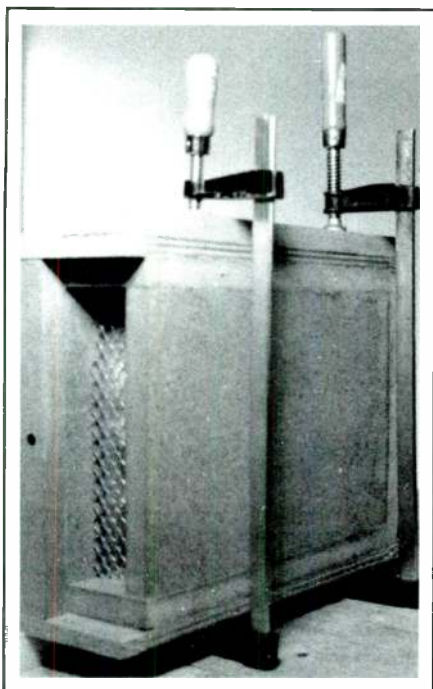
Clamping base molding to enclosure side. Note aluminum barrier in recess of line exit.
